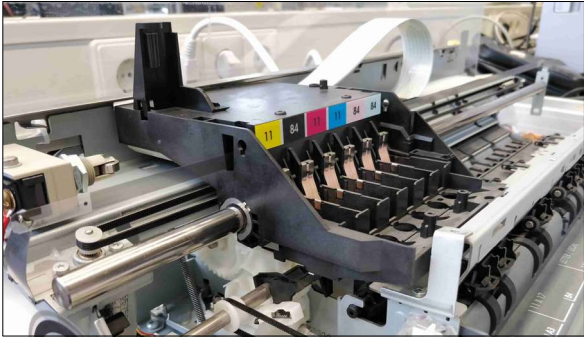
Printer motion system with: motor, drive belt, slide guide, and carriage with printhead
